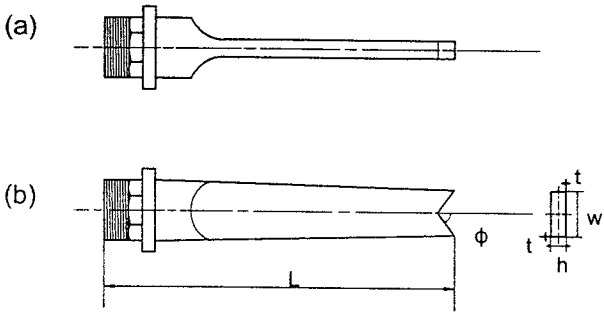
Notched nozzle configuration. (a) Side view, (b) Top view
